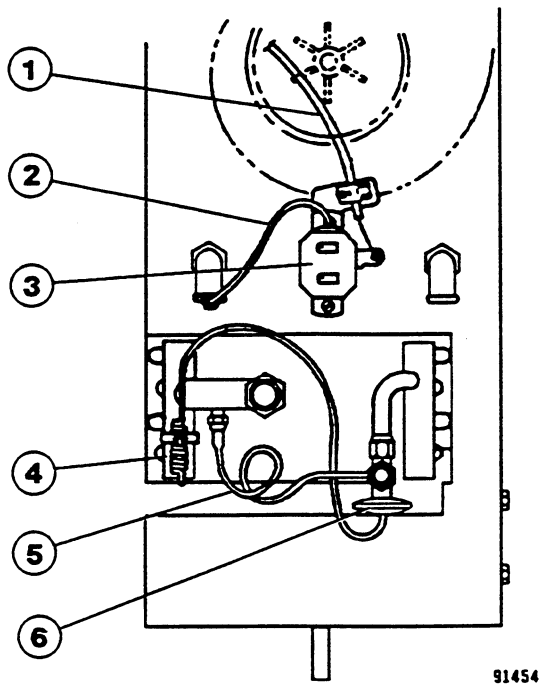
EVAPORATOR ASSEMBLY COMPONENTS
